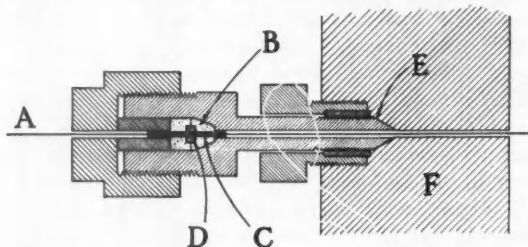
High pressure thermocouple lead-in. *A*—platinum wire; *B*—Teflon packing; *C*—steel capillary tube hard soldered to *A*; *D*—collar soldered to *C*; *E*—conventional cone-type pressure seal; *F*—wall of pressure vessel.
